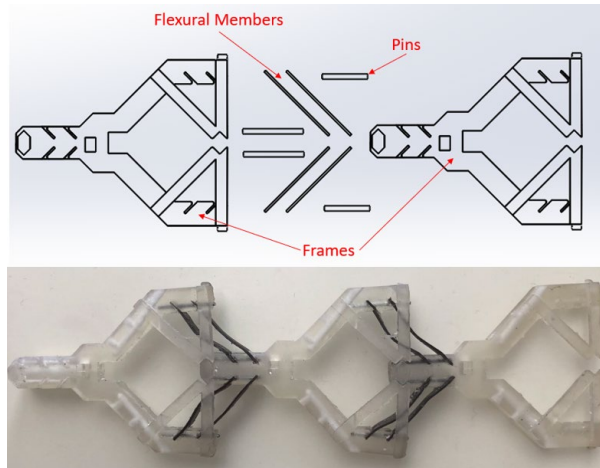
Assembly components a) Exploded and labeled view of single unit actuator and b) Two module actuator assembly.
